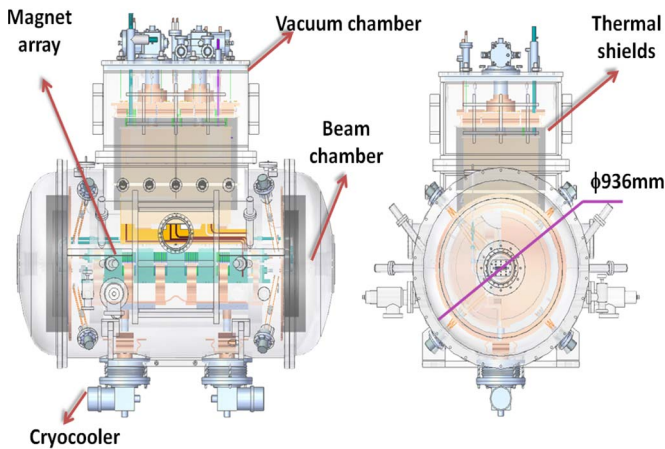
Three-dimensional structure of the SCU prototype at SINAP.
